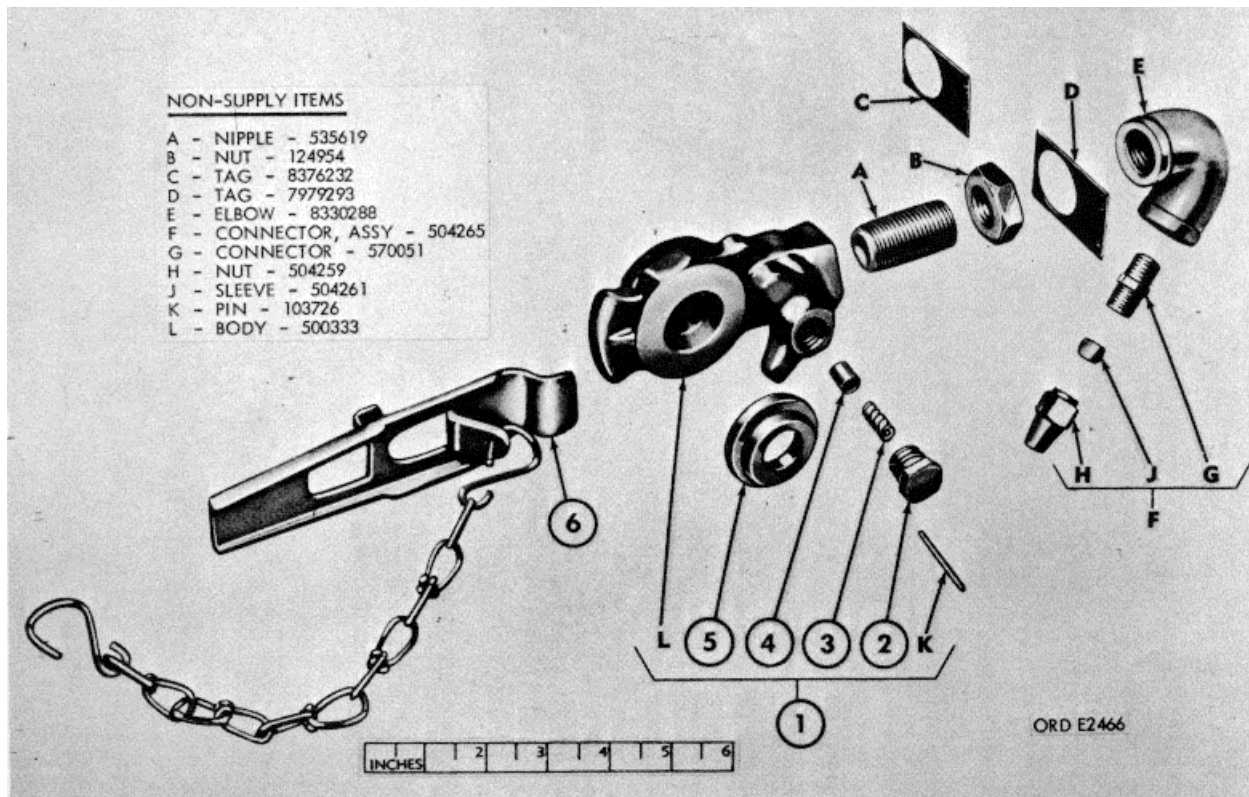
AIR HOSE COUPLINGS-EXPLODED VIEW.
